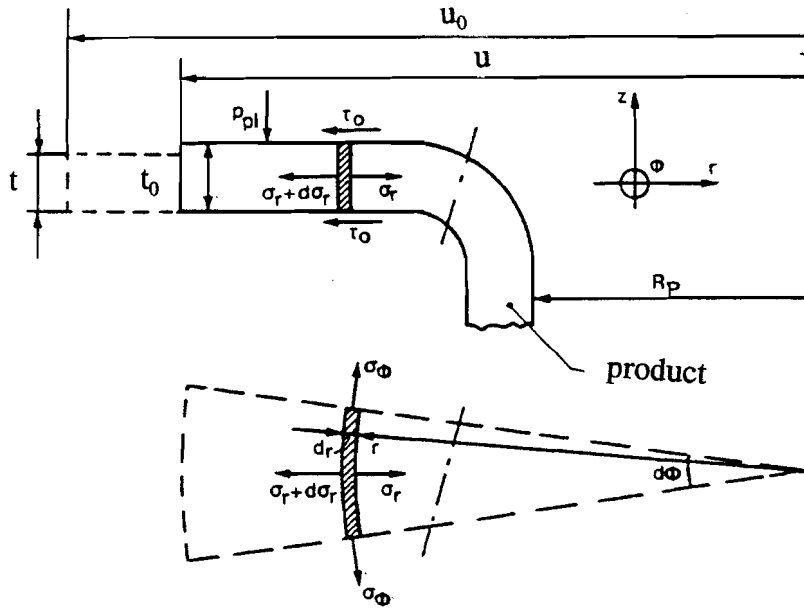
Equilibrium at the flange in deep drawing with blank holder, [Ramaekers, 1988]
